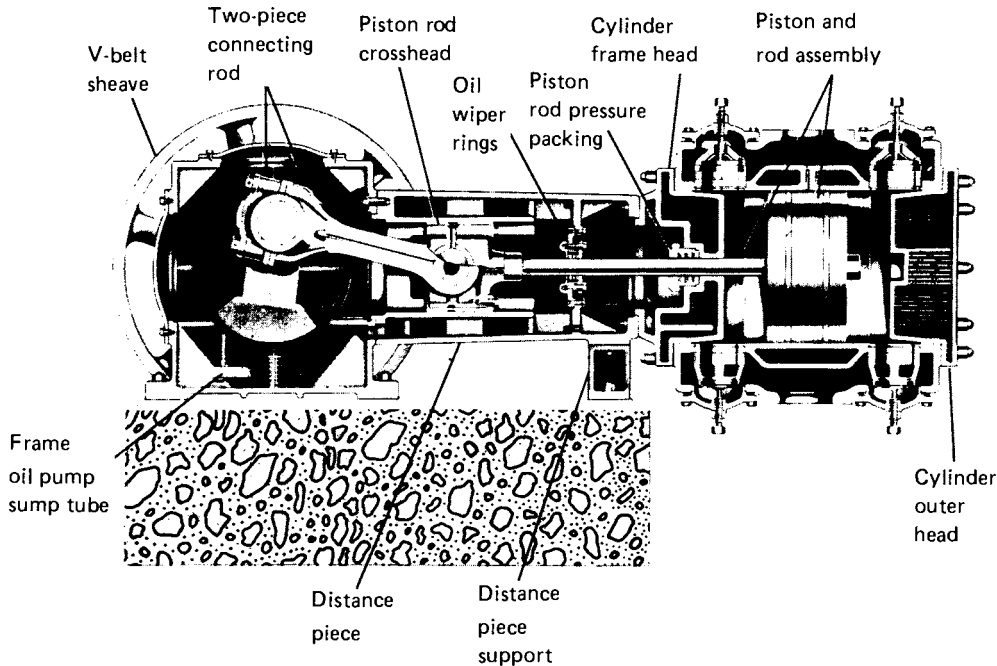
Single-stage double-acting reciprocating compressor.
